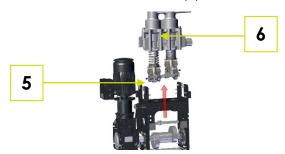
Dismounting of the shear axles, taking out the pump unit
